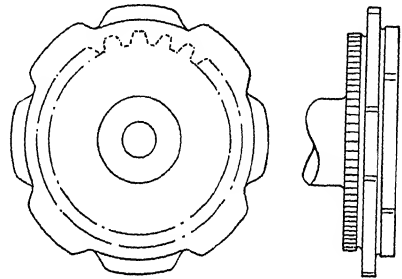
ARRANGEMENT OF CAMSHAFT.
